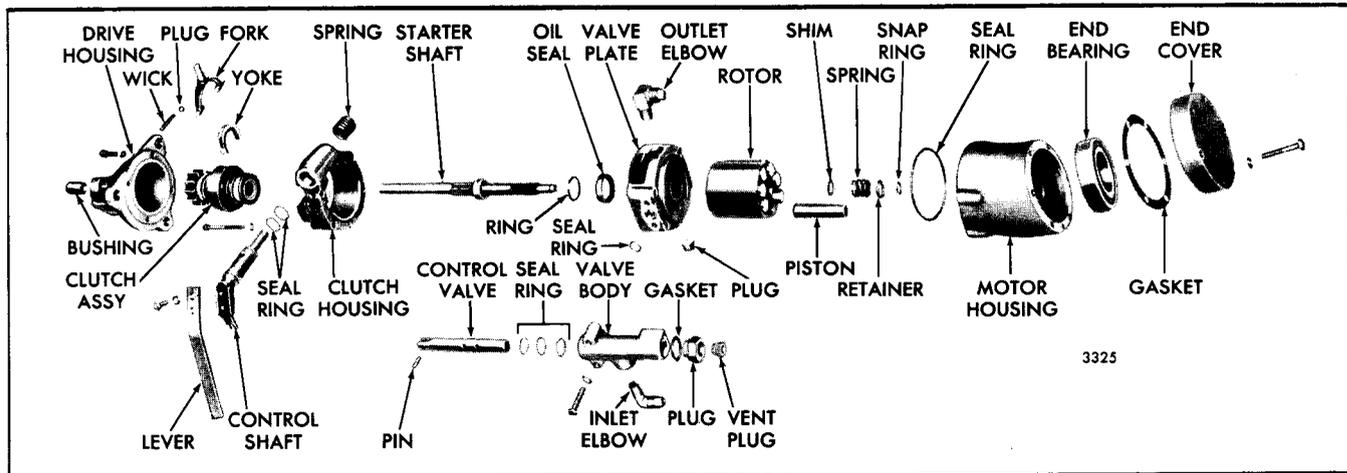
Hydrostarter Motor Details and Relative Location of Parts
